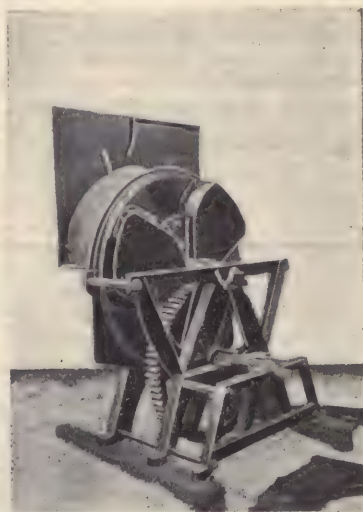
Rear View, with casing removed, showing boxes behind the knives.
